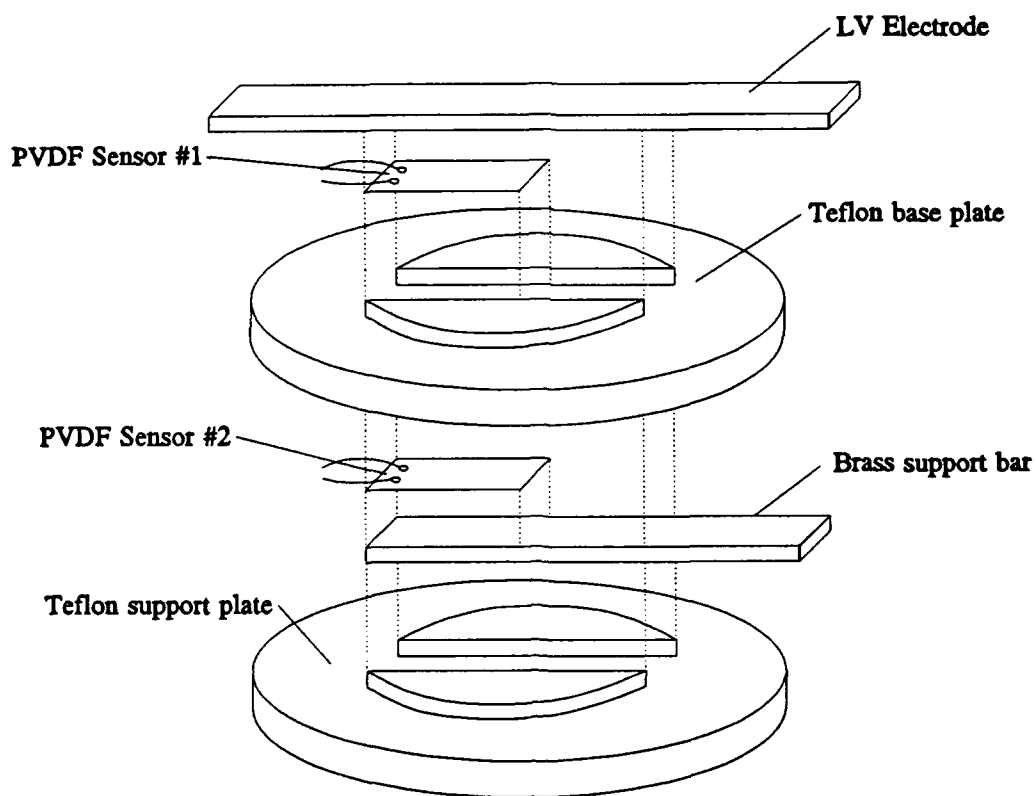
RELATIVE LOCATION OF PRESSURE SENSORS, EXPLODED
